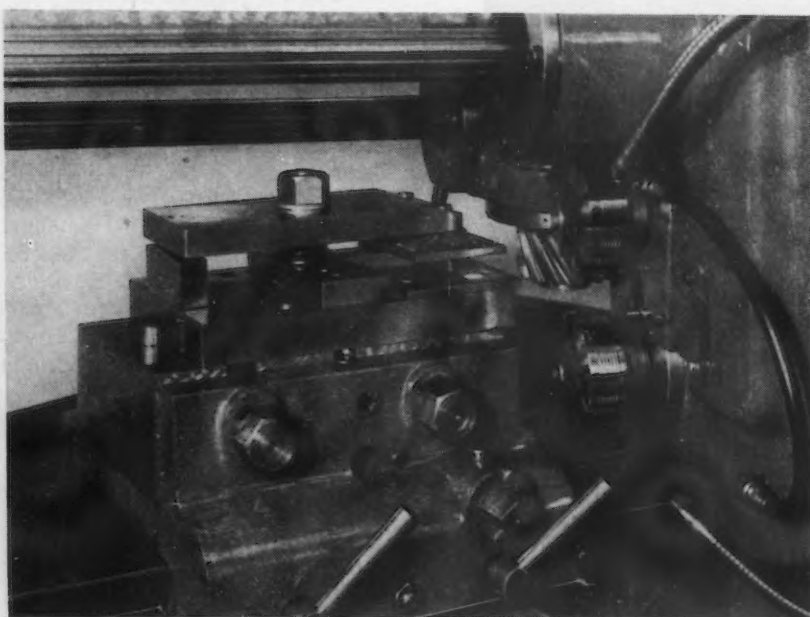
In milling stainless steel turbine blades with the 4 in. spiral slab mill shown in this special "Modern" miller, a 47 per cent increase in cutter life between grinds was obtained by regrounding with resinoid bonded wheels.
